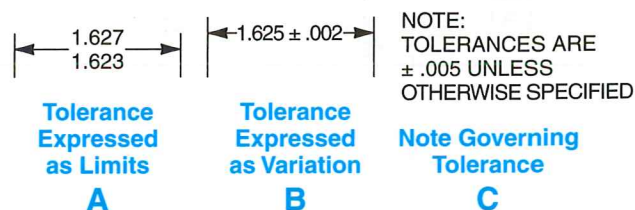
Standard methods of indicating a tolerance on a drawing.
